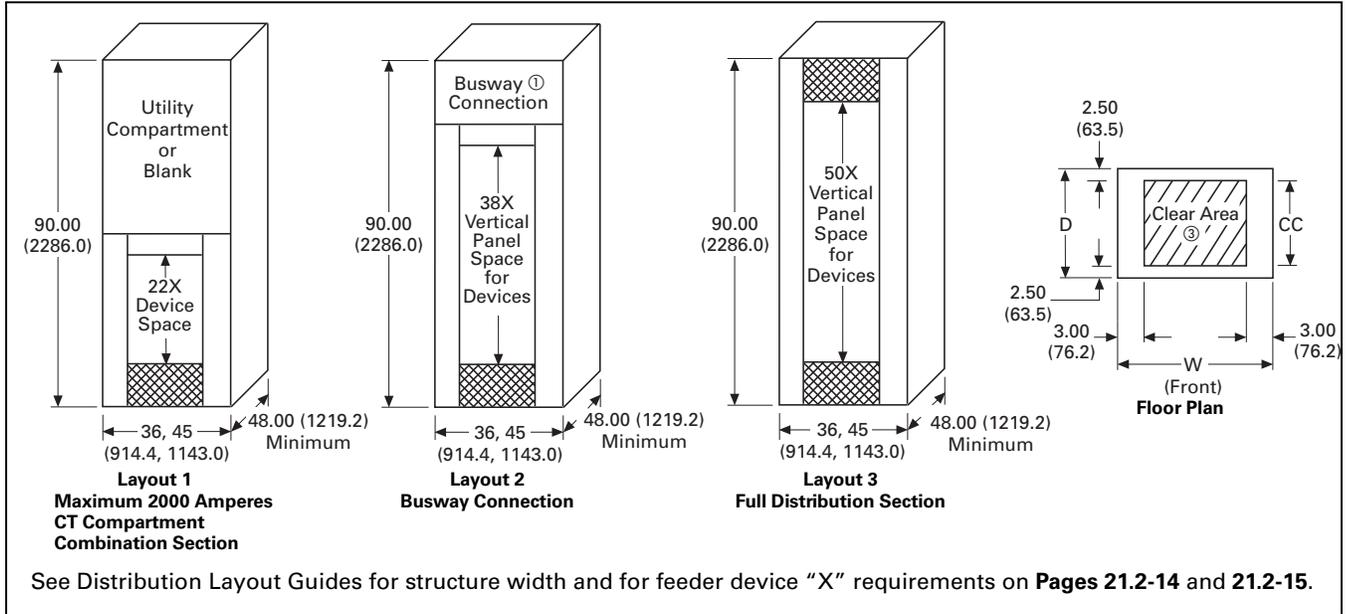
Distribution Section Layout—Dimensions in Inches (mm)
